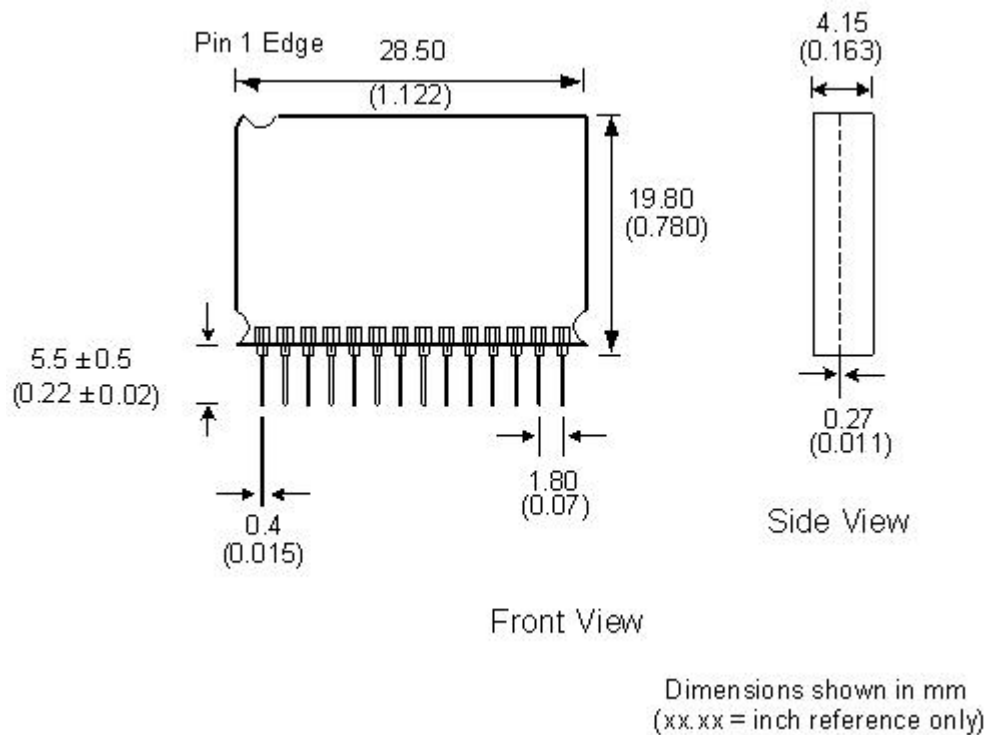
LPT-11 Transceiver Mechanical Footprint
